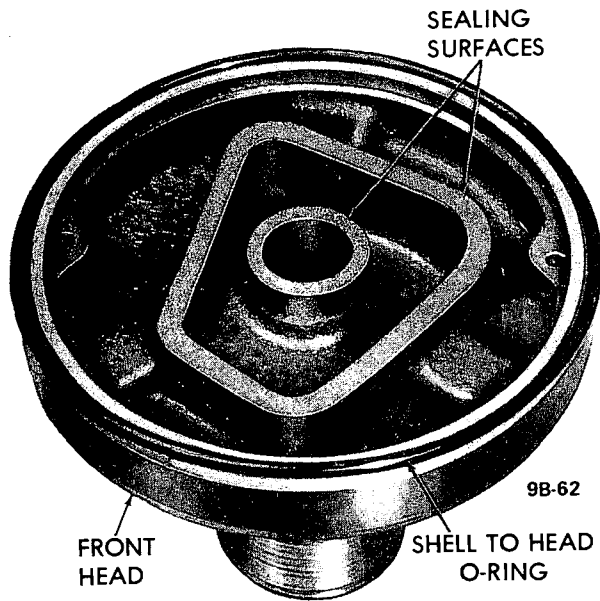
B-87 Front Head Sealing Surfaces - 6 Cylinder Compressor
